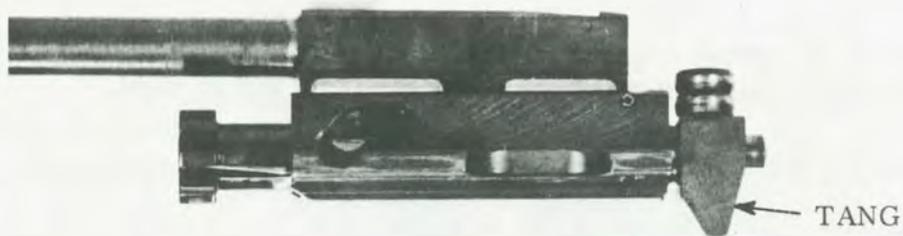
Tang on the carrier cap assembly in the downward position.
